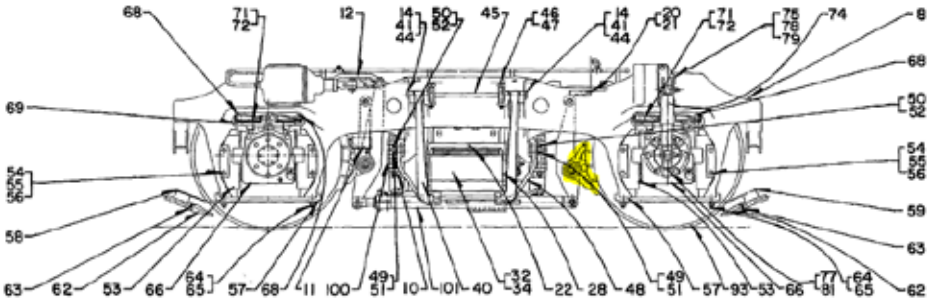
GP, Single Brake Shoe Dead-Lever Brake Head location (steel bushing mates with thermoplastic ferrule)
